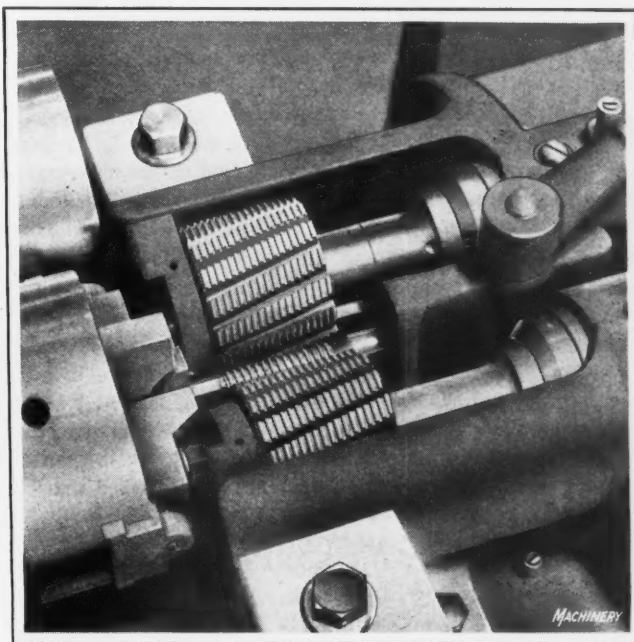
Close-up View, showing the Arrangement of the Two Hobs
